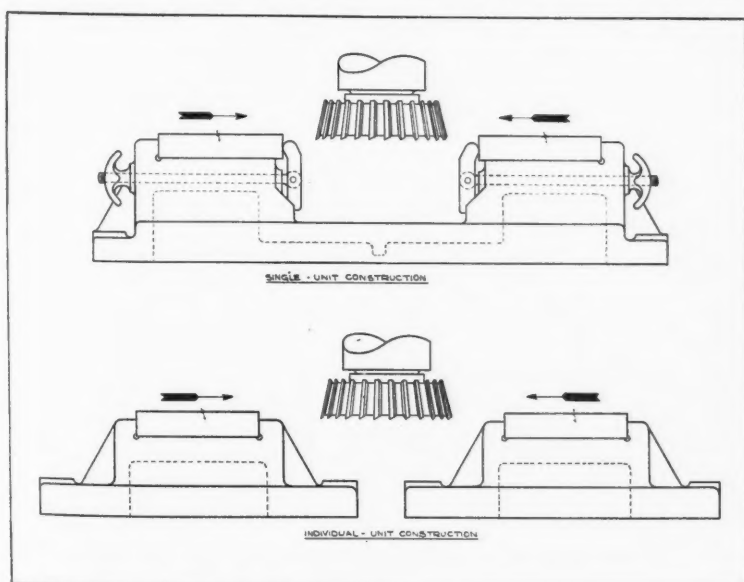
Reciprocating Milling Fixtures of Single- and Individual-unit Construction
